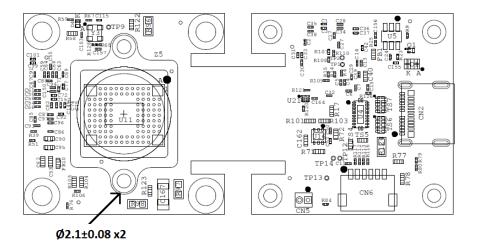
Bottom View of See3CAM_CU27 Mechanical Dimensions
